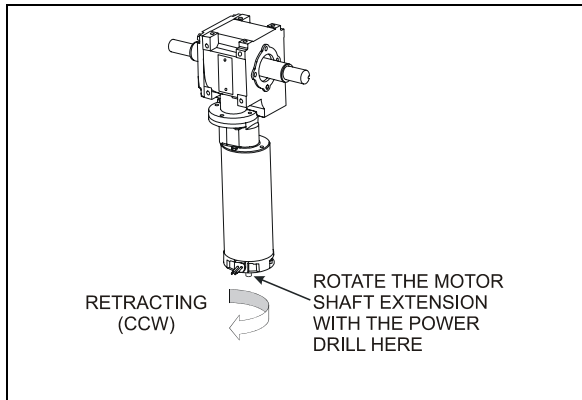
SLIDE-OUT MOTOR ROTATION
